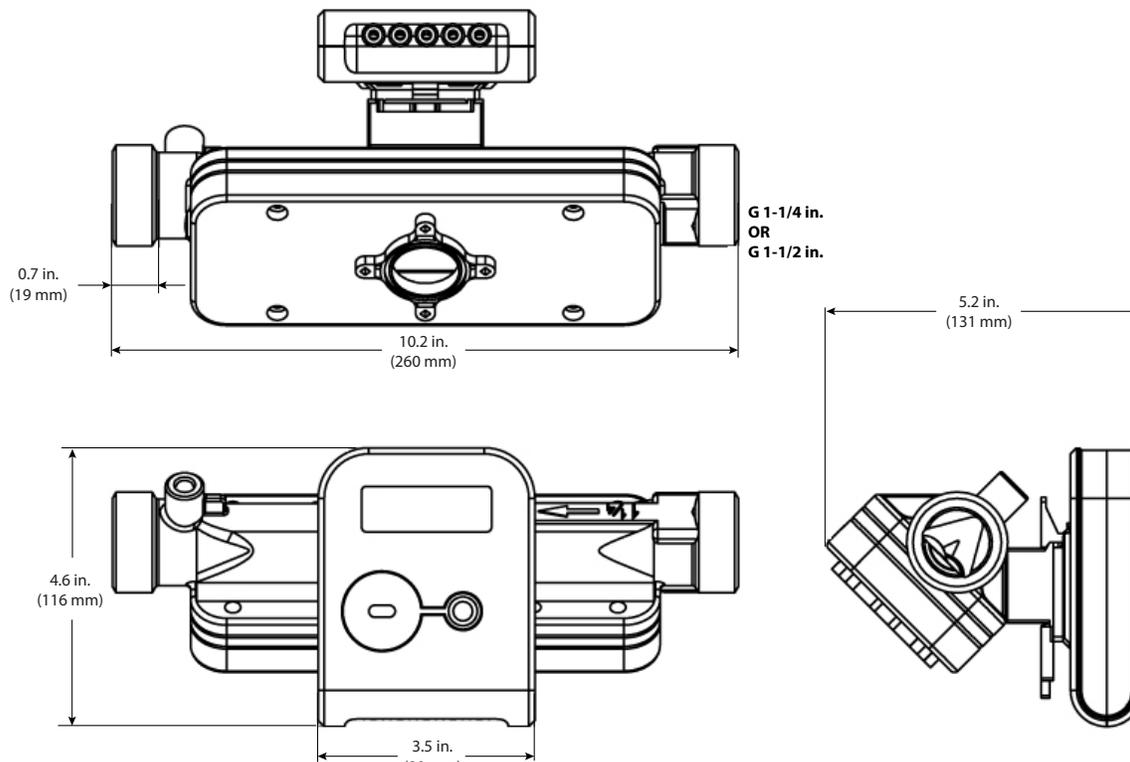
Flow sensor $q_p = 3.5/6.0 \text{ m}^3/\text{h}$; $L=260 \text{ mm}$; connection type: thread G1-1/4 in. or G1-1/2 in.
